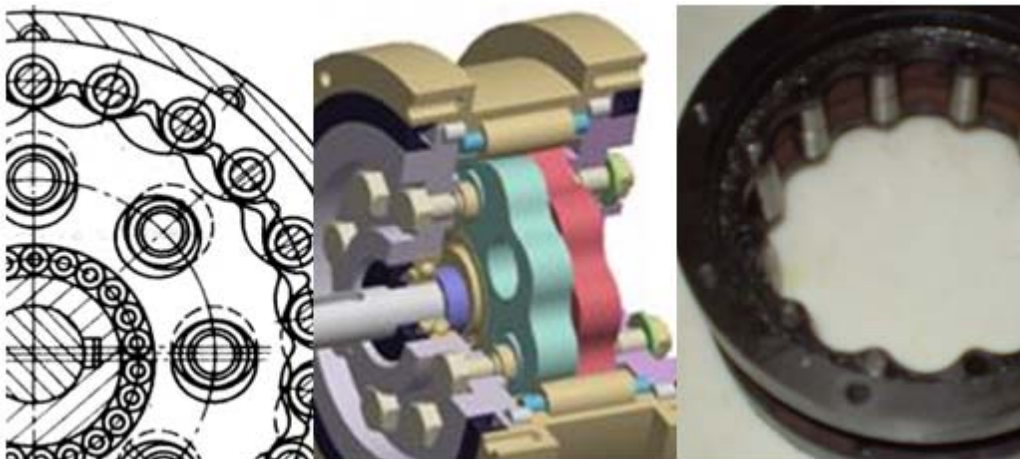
The teeth of the pin gear designed as cylindrical pins with rollers.
